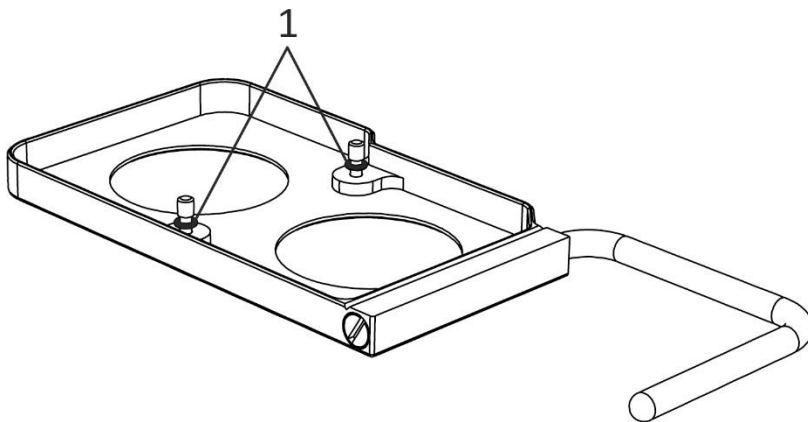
O ring for screws used to fasten the ABG probe's protection cover
